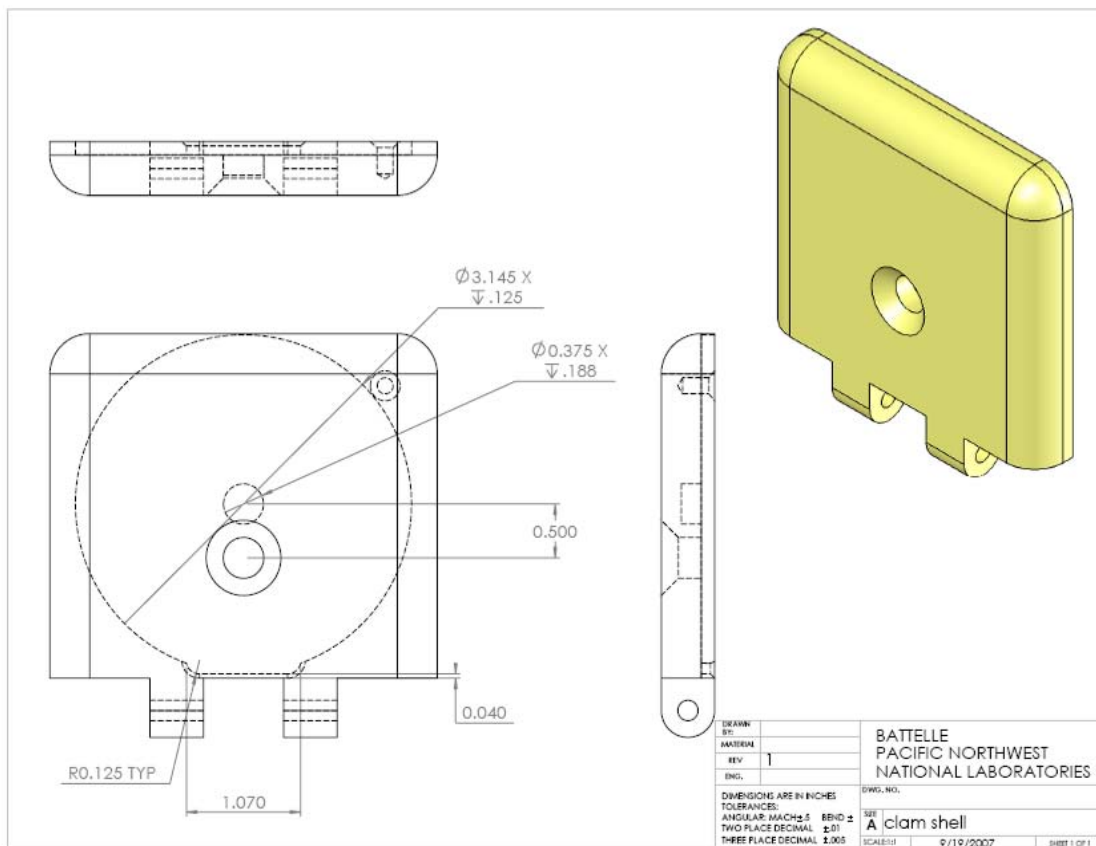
Dimensional drawing of DCE flip top cartridge cover
